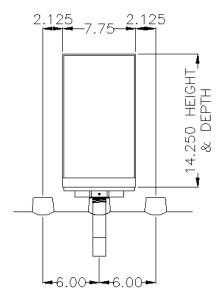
Pony® Clamshell enclosure installed between 6" center-to-center thread-o-lets.
